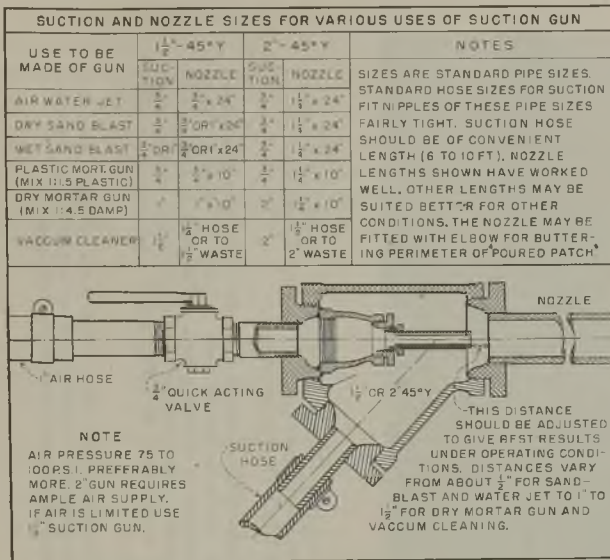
Air - suction gun for dry sand blasting, washing, mortar application, and vacuum cleaning.
